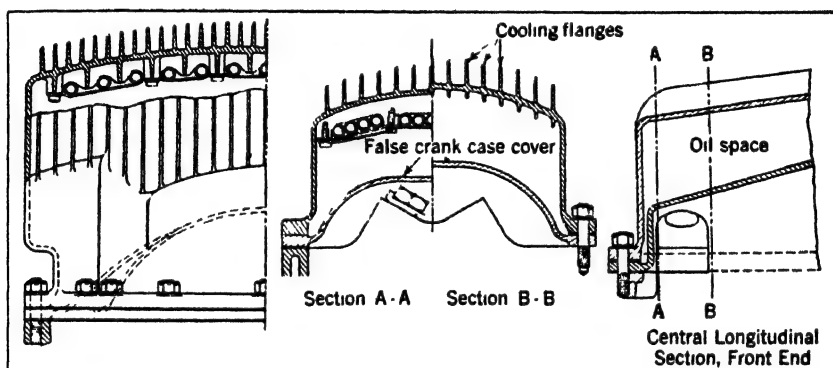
Detailed Views of Oil-Cooler of Some of the Packard Inverted Aircraft Engines.
